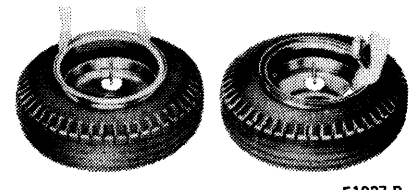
Positioning and Starting Ring—Two-Piece Rim
